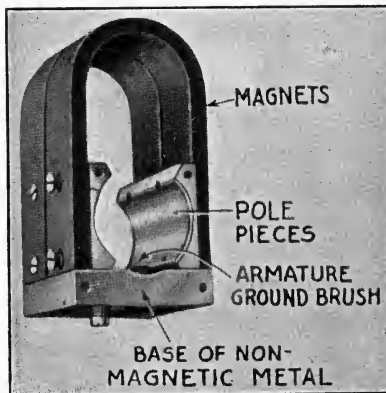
Magnets and pole pieces of Bosch magneto.
